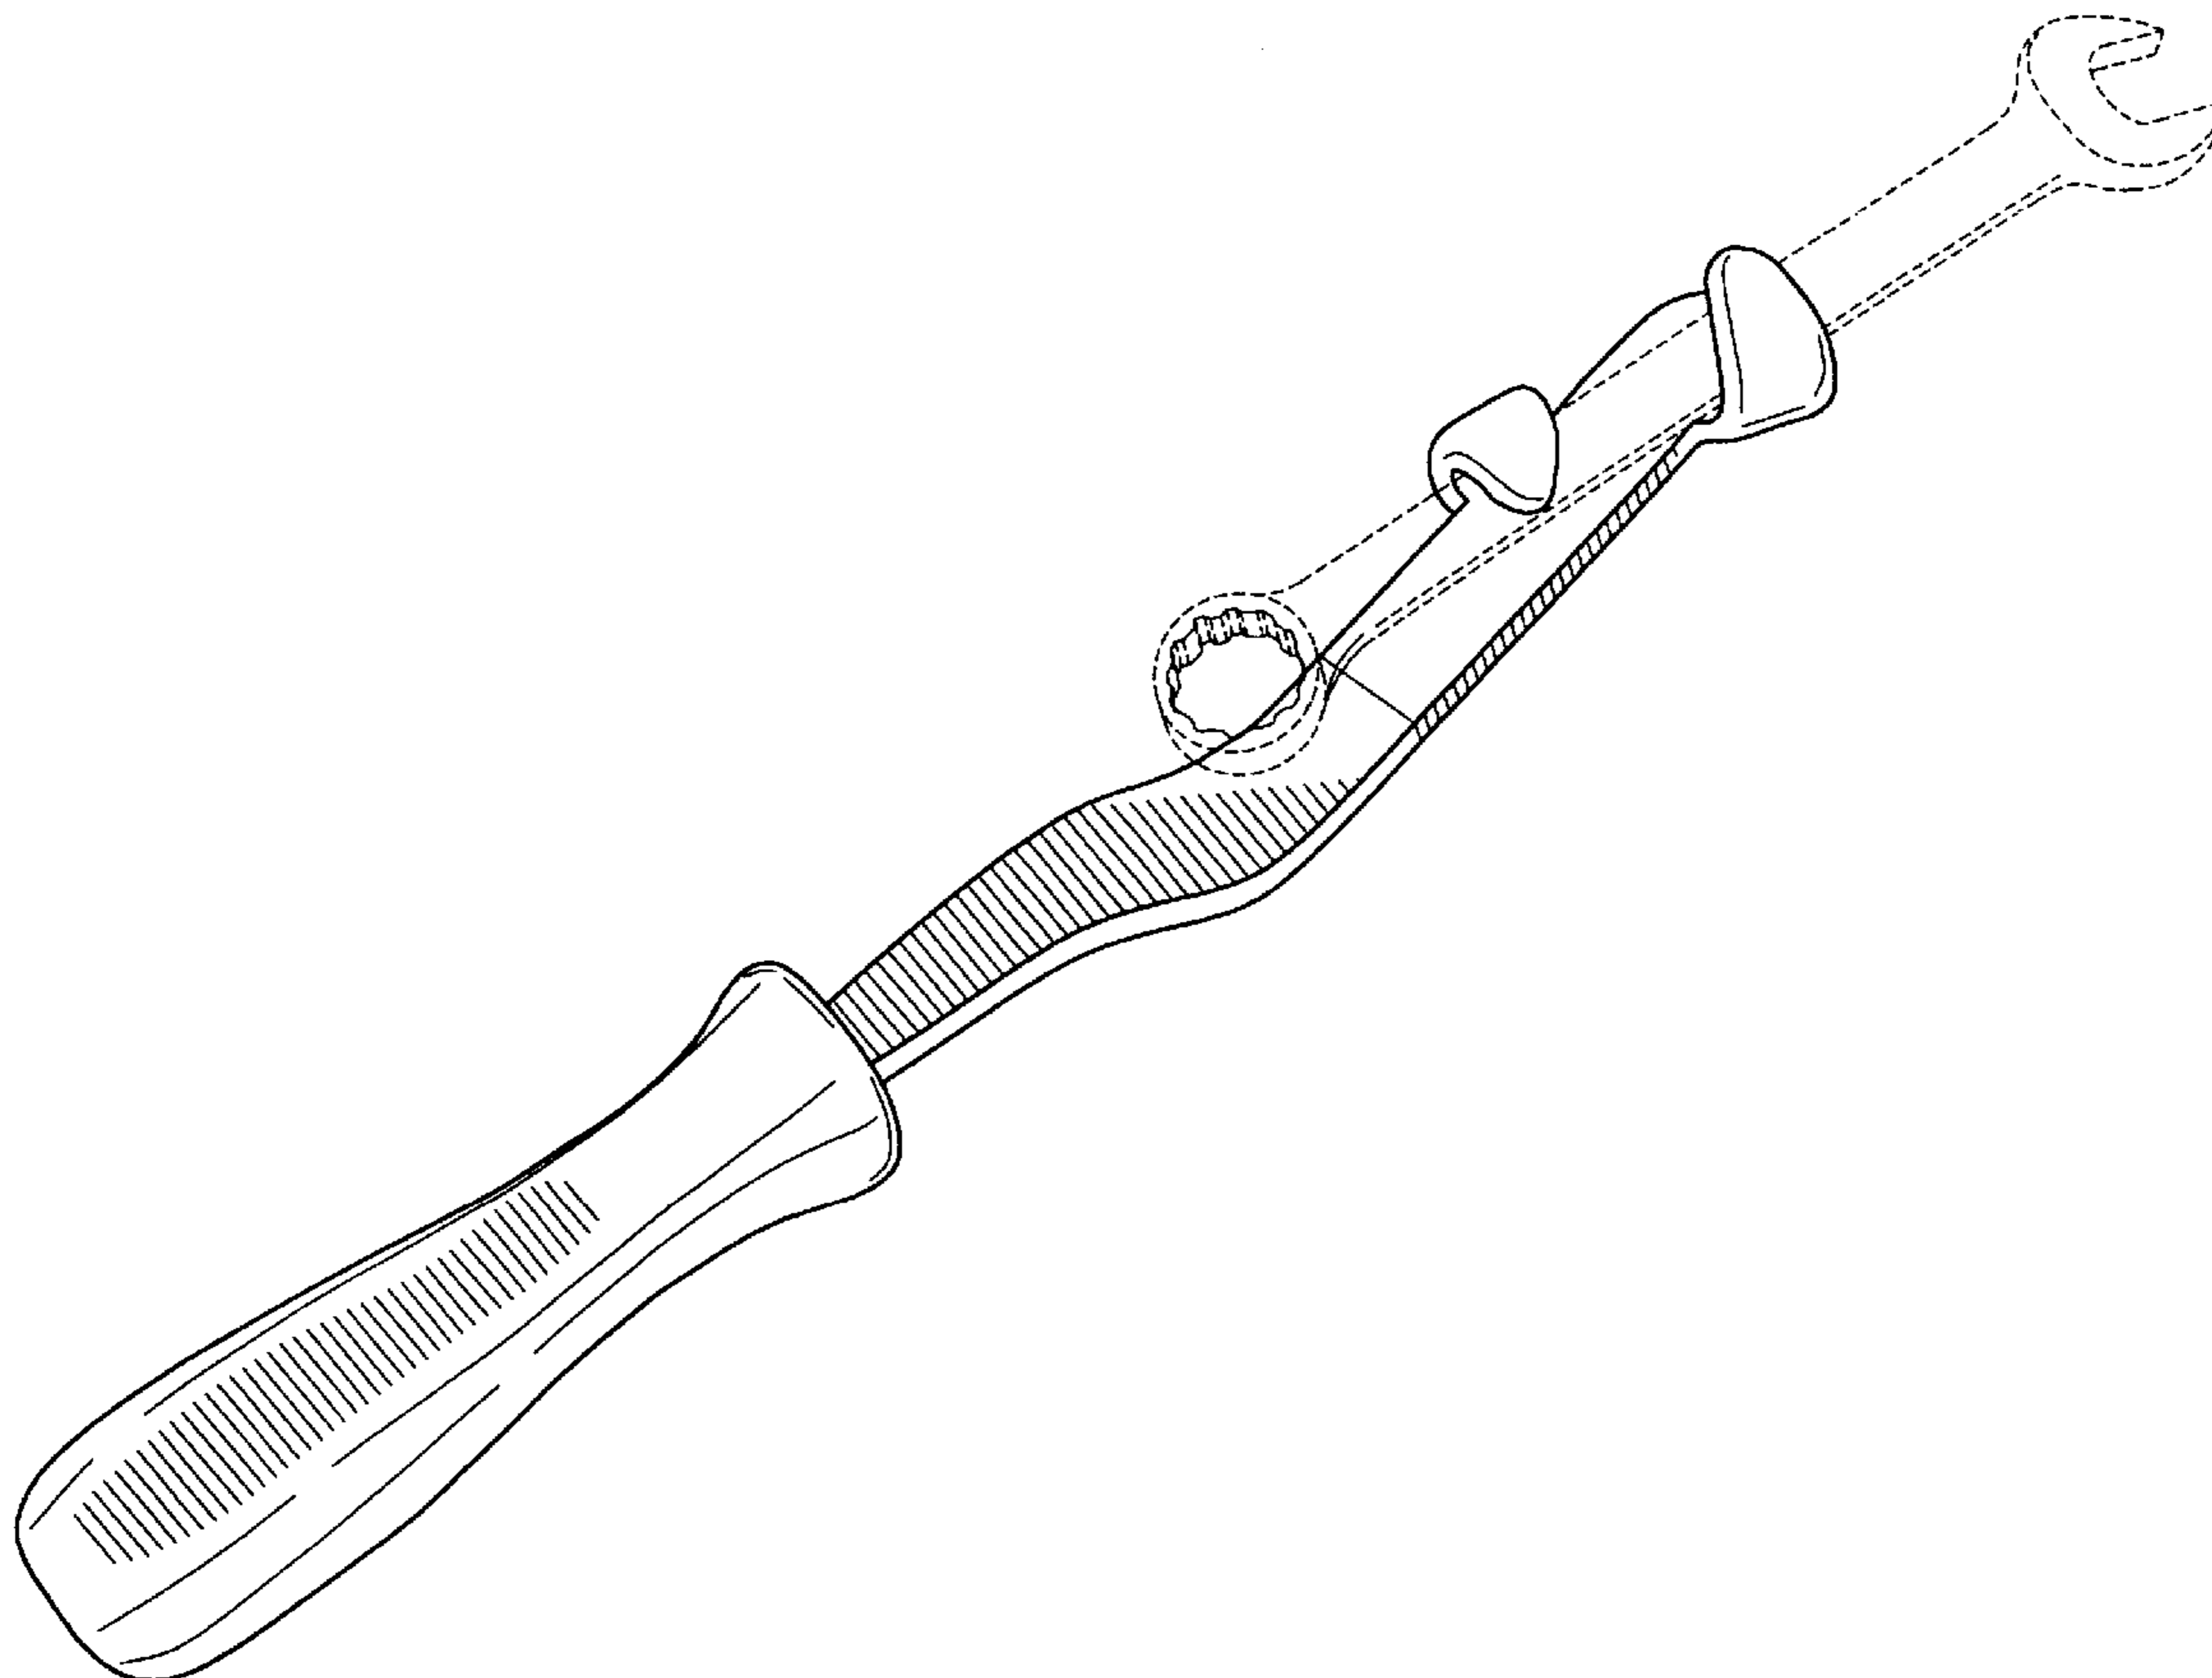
illustrates a front elevation view of the rear wrench extender shown in FIG. 1;
